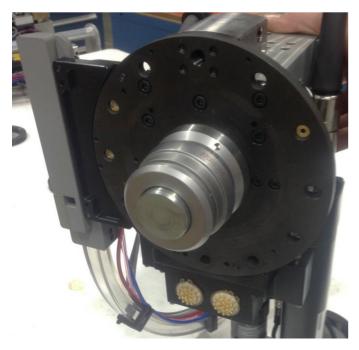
Tool interface with electrical, pneumatic, and fastener feed connectors.
